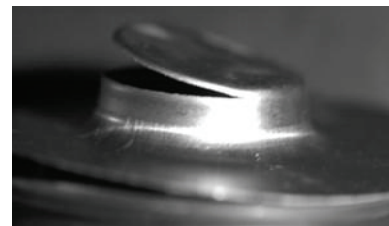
Fracture occurrence in one of the deep drawing tests
